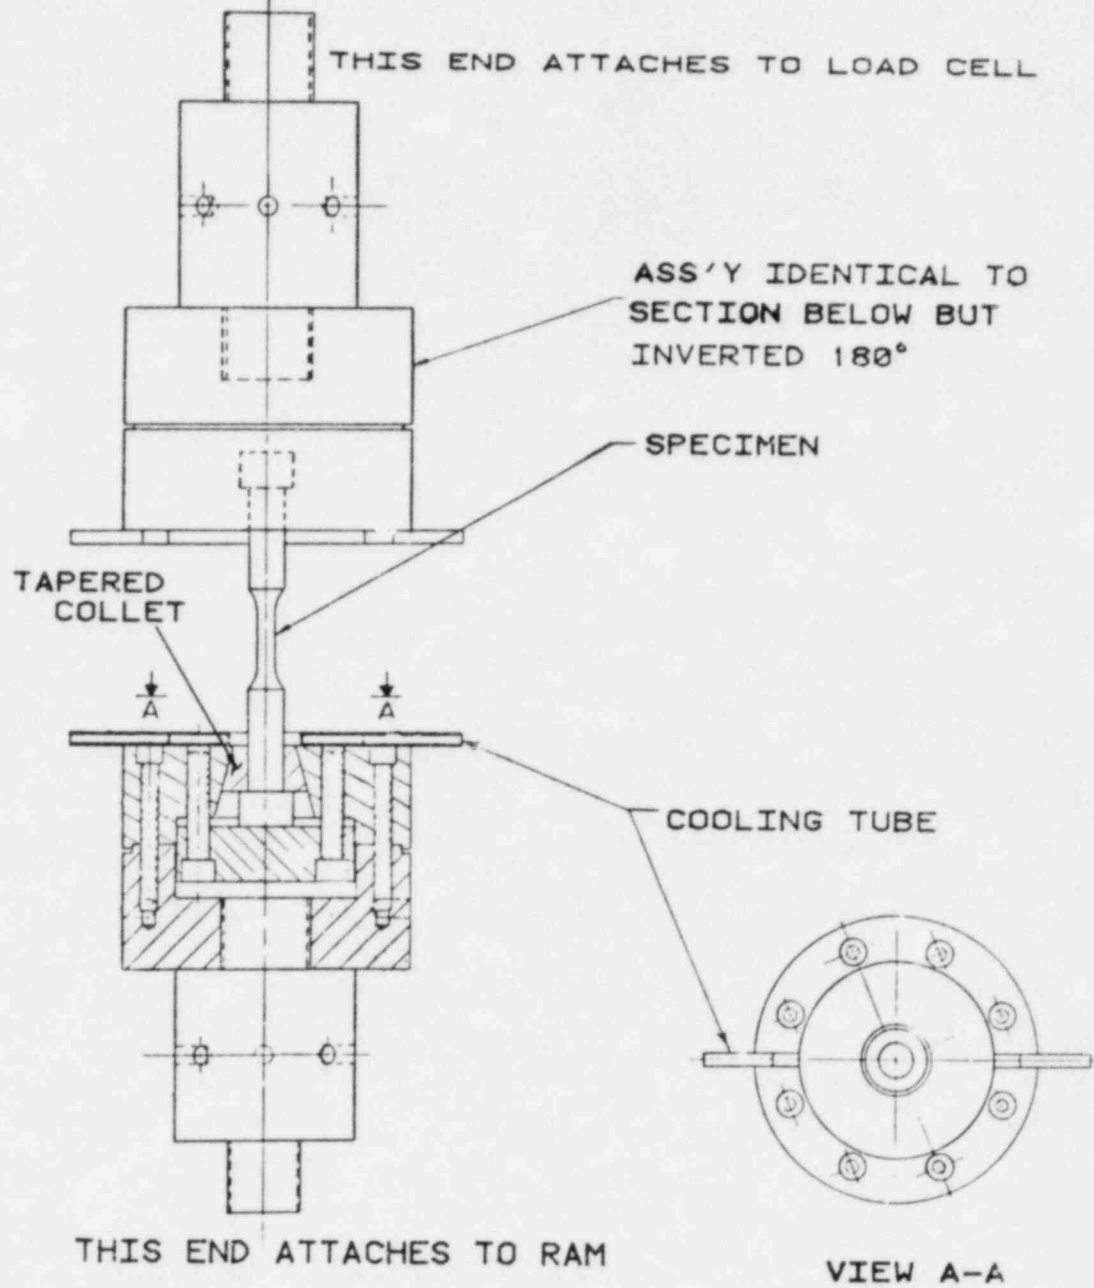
Cutaway assembly drawing of fixtures and tapered split collet grips designed and built at Sandia.
